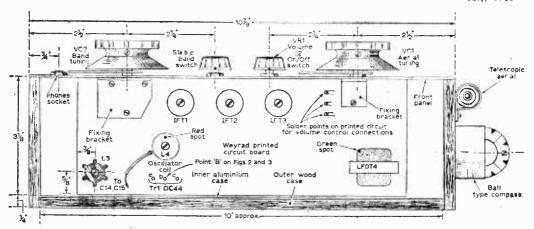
Looking down on top of the cabinet, this view indicates the positioning of the printed circuit board.
